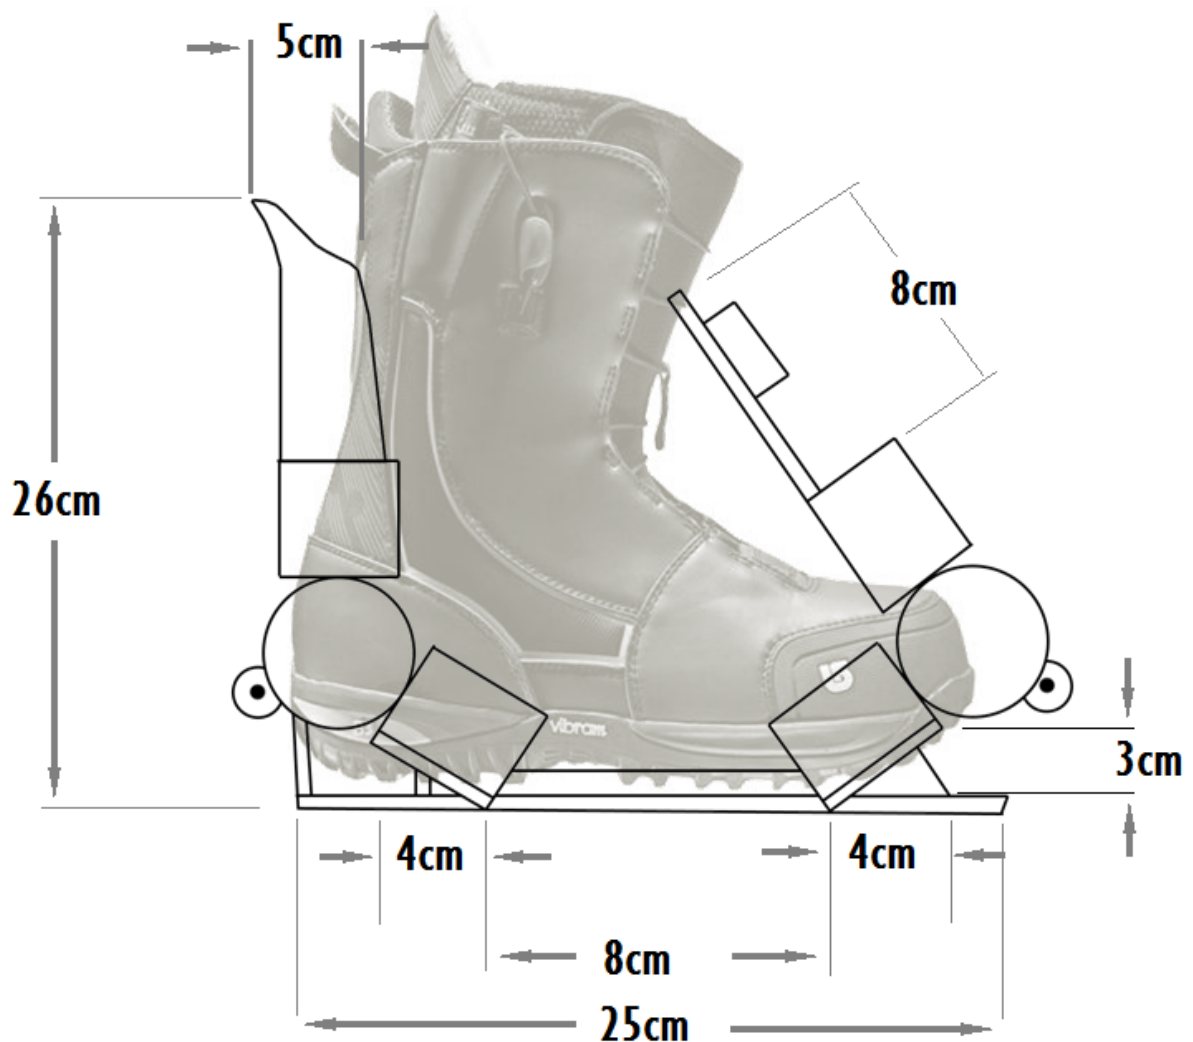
An overview and dimensions of binding unit with hinges and securing bracket
